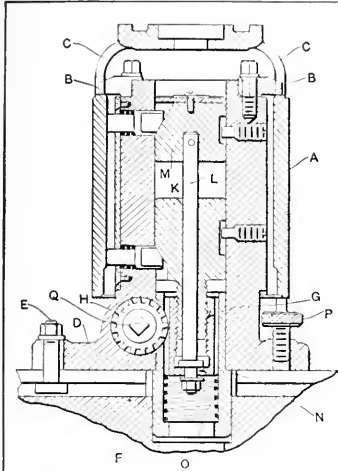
Vertical Boring Mill Fixture for holding Part A internally
